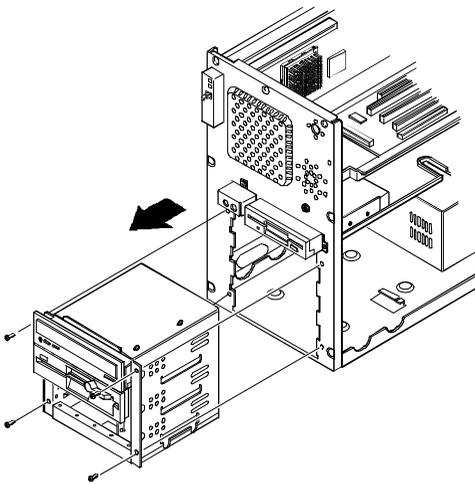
19 Removing Lower Front Device Bay Assembly
